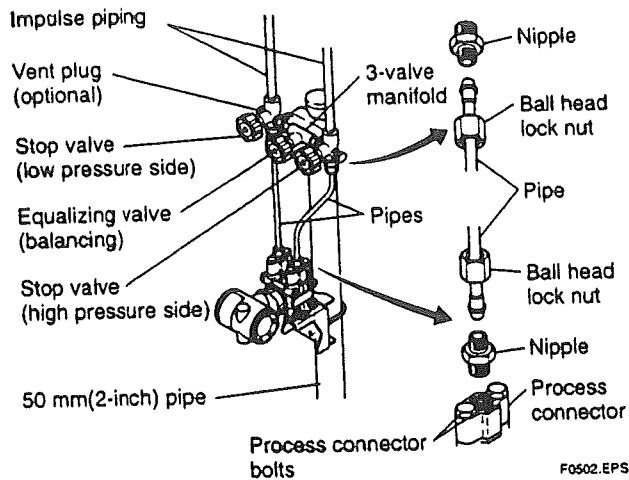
3-Valve Manifold (Pipe-Mounting Type)
